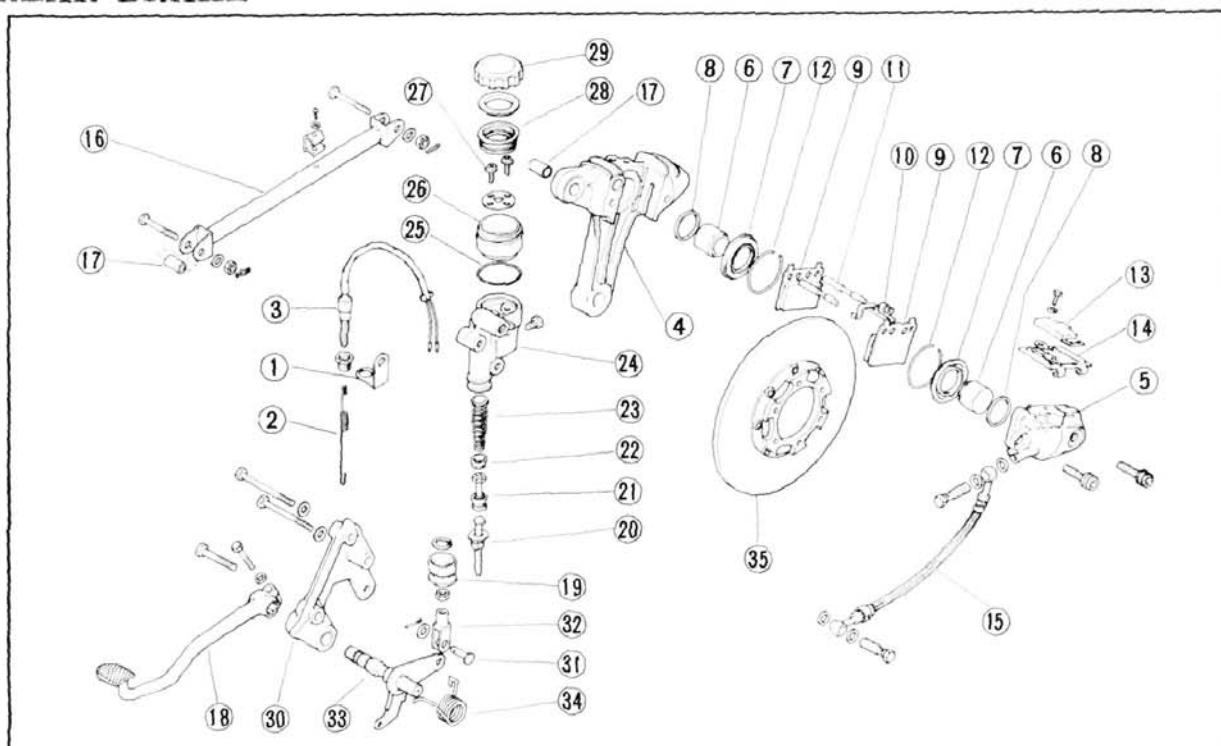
① Stop switch bracket ⑩ Spring pad set ⑲ Master cylinder, boot ⑳ Diaphragm
